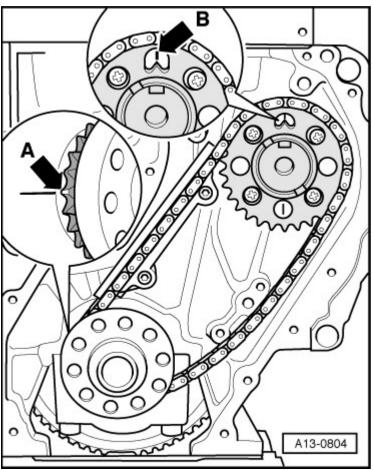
Identifying Markings On Roller Chains Courtesy of AUDI OF AMERICA, LLC
